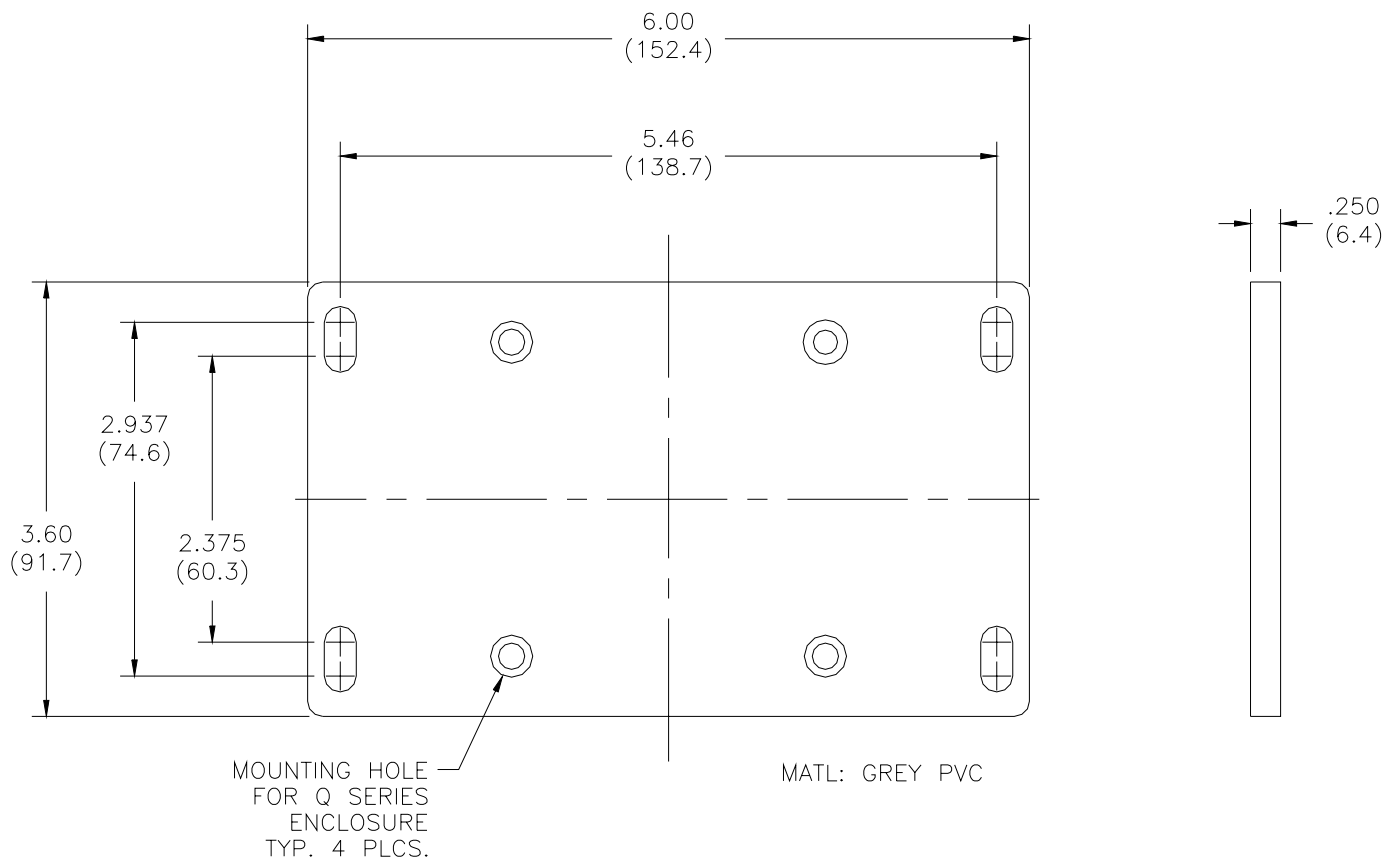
Wall or Pipe mount Bracket (ATI-0707)
